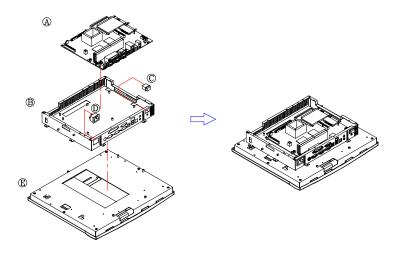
LP 1500 MOTHERBOARD ASSEMBLY
